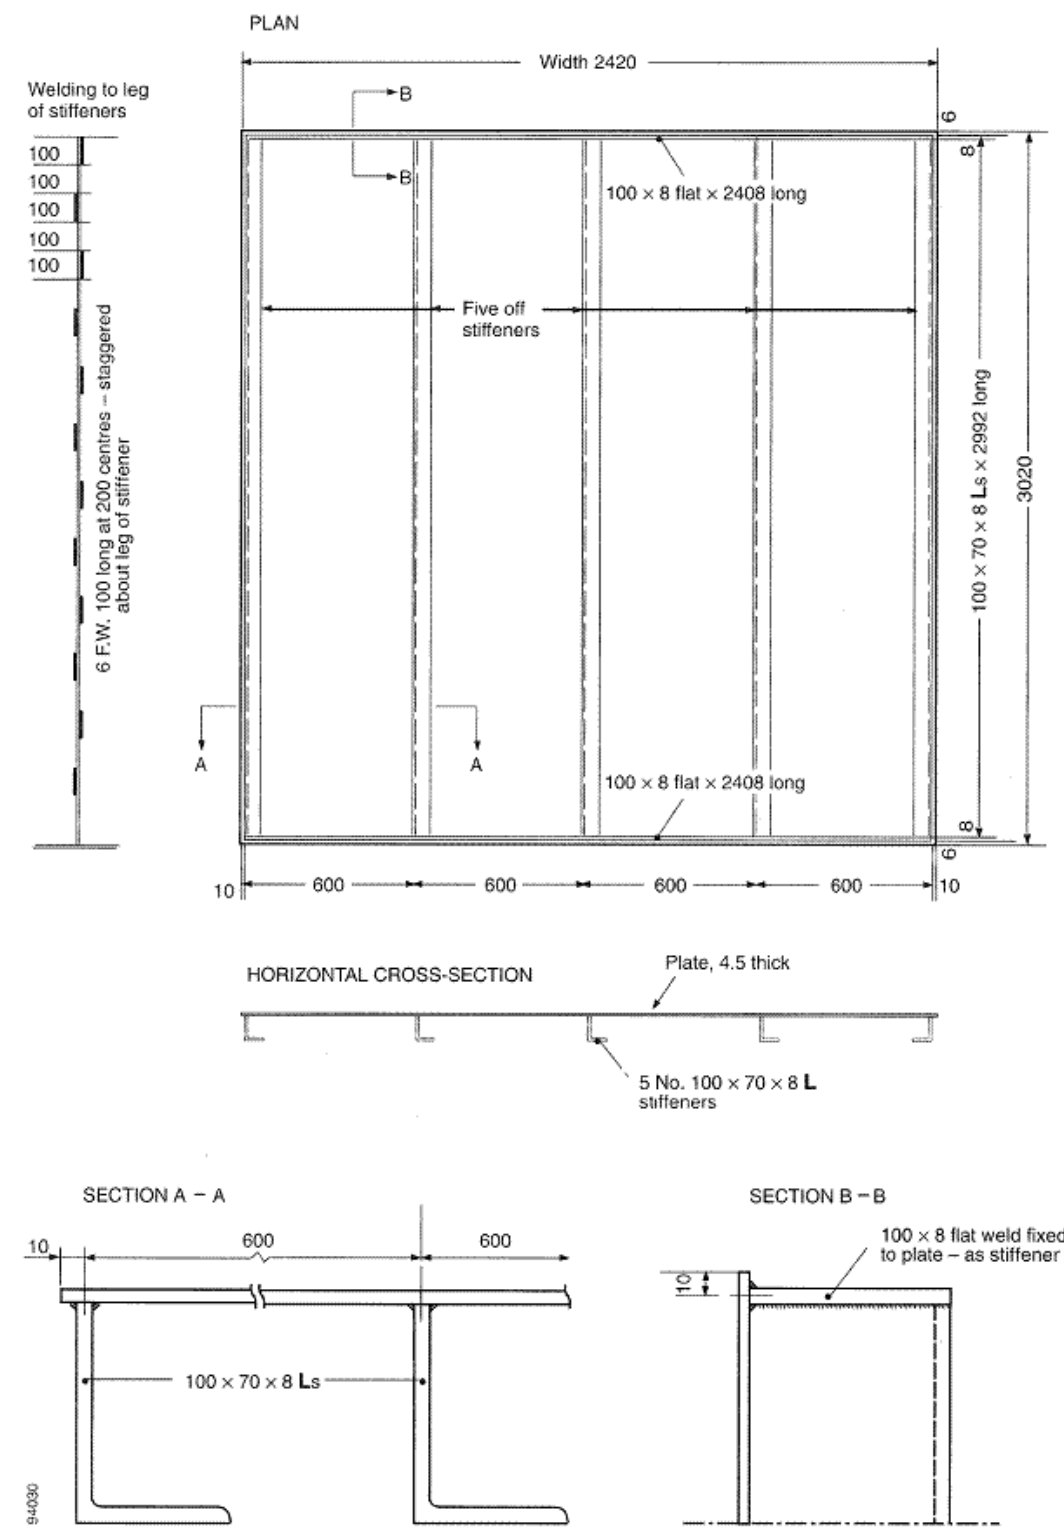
Structural steel core for "A" class deck and "B" class ceiling
